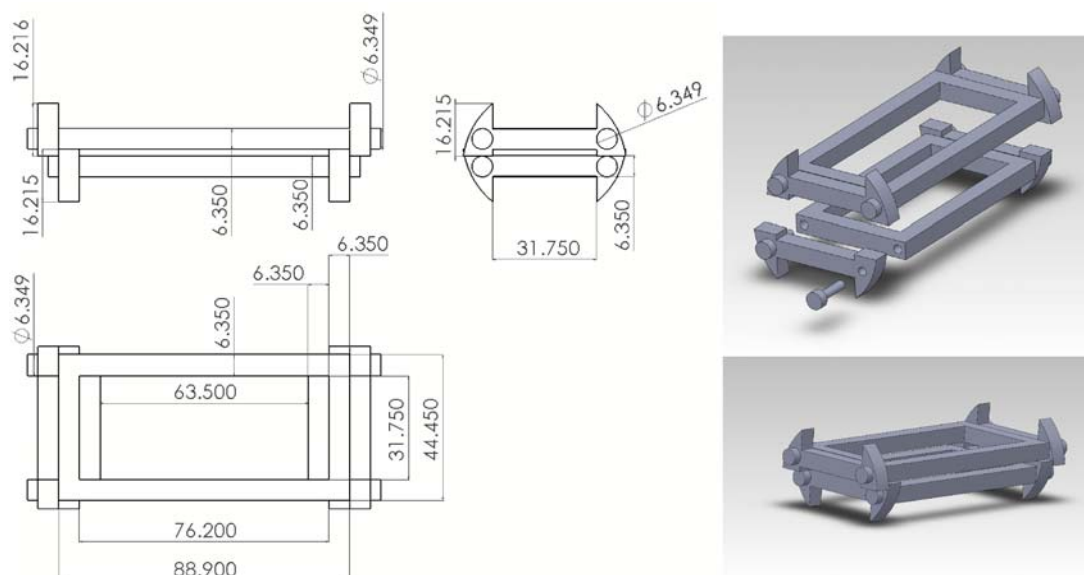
(*Left*) Dimensions (in mm) for all-graphite tensioning frame; (*upper right*) exploded view of tensioning frame components showing attachment of “horned bumpers” with threaded graphite screws; (*lower right*) assembled tensioning frame.
